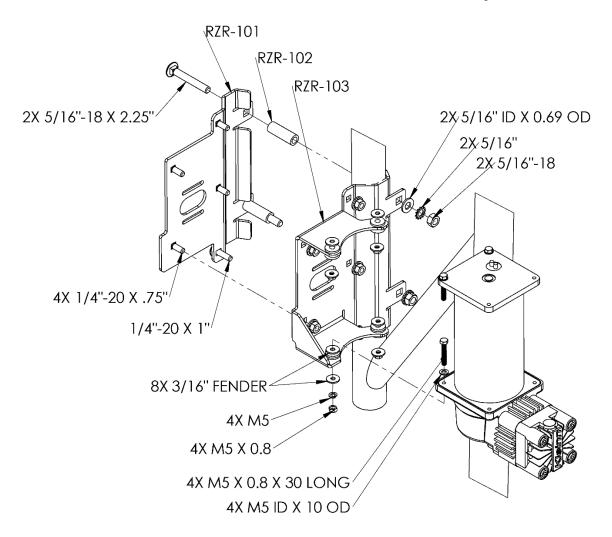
Air Compressor Assembly & Hardware Exploded View
